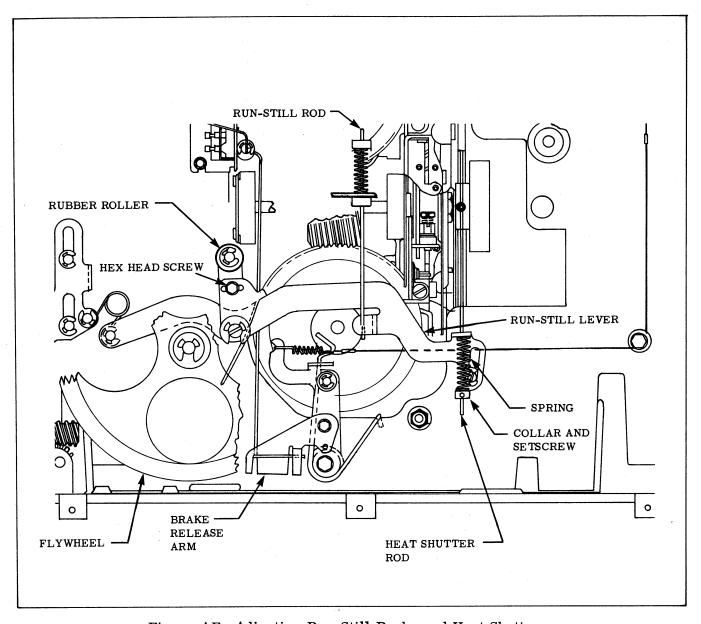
Figure AF. Adjusting Run-Still Brake and Heat Shutter
